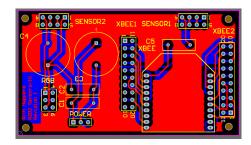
Bottom Layer of Robot MSP432 PCB
